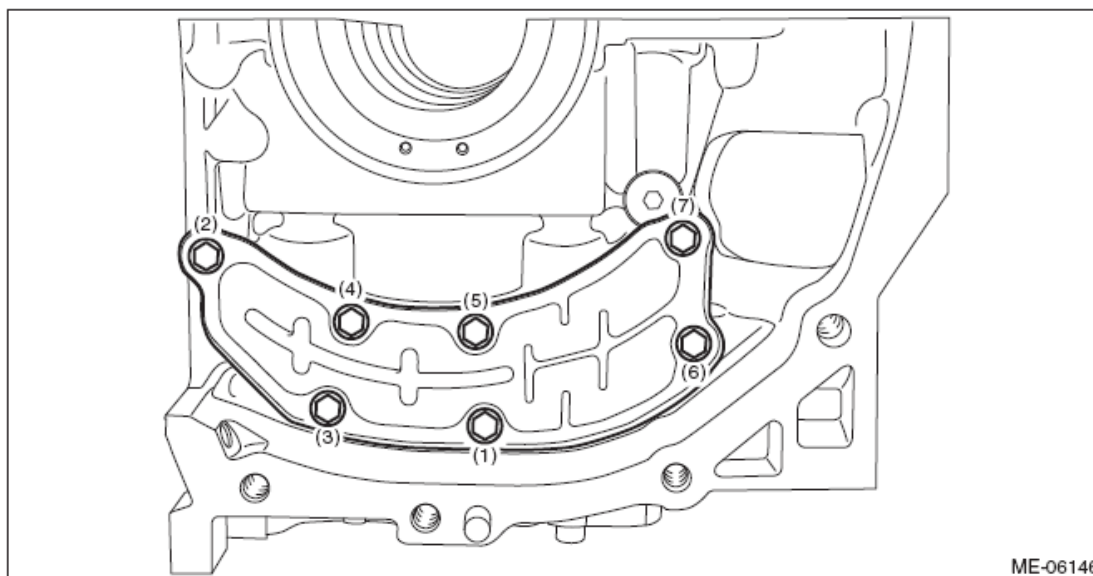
Identifying Oil Separator Cover To Cylinder Block Bolts Tightening Sequence
